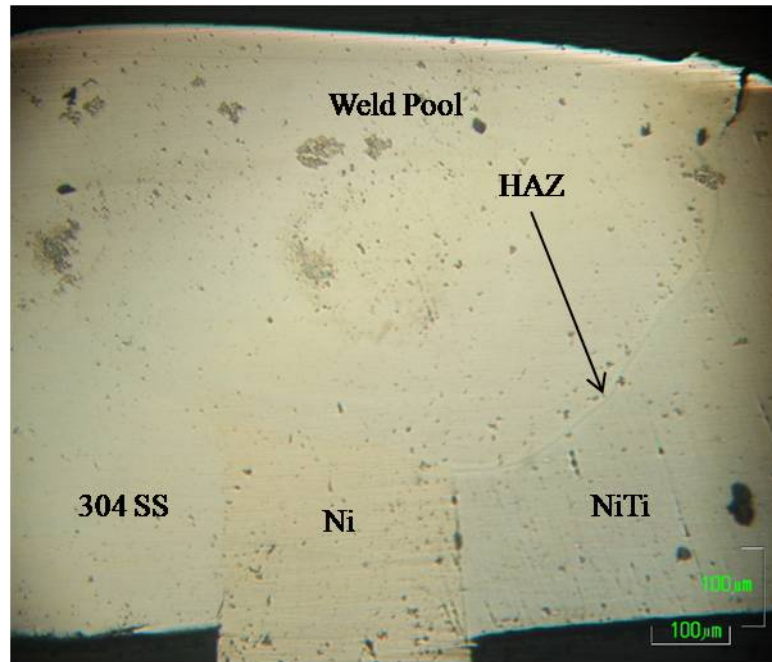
NiTi/304 SS laser weld 2.
